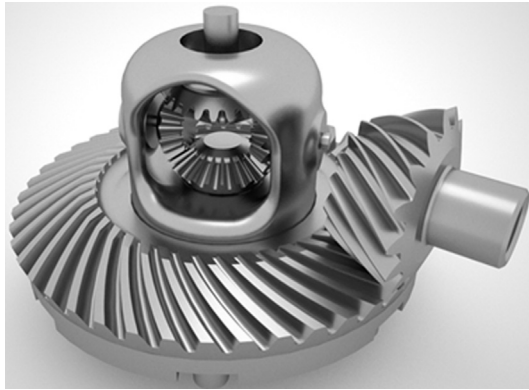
A typical bevel gear differential unit with straight bevel and hypoid gears.
